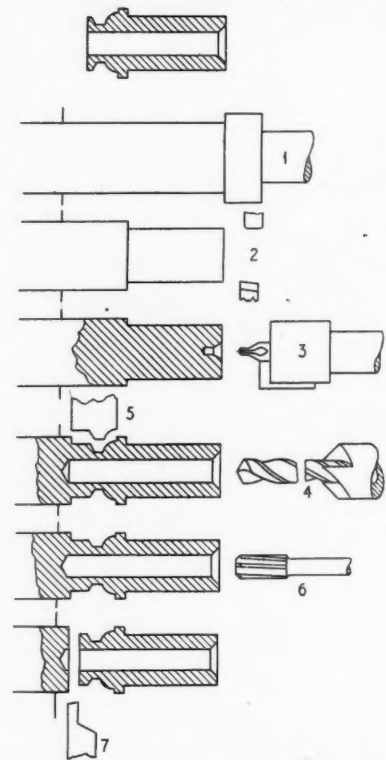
The sequence of operations for the component discussed in the text. Reading from top to bottom: the finished part; bar feeding; roller-box turning; centring and facing; drilling; chamfering and forming; reaming and parting-off are illustrated in turn
